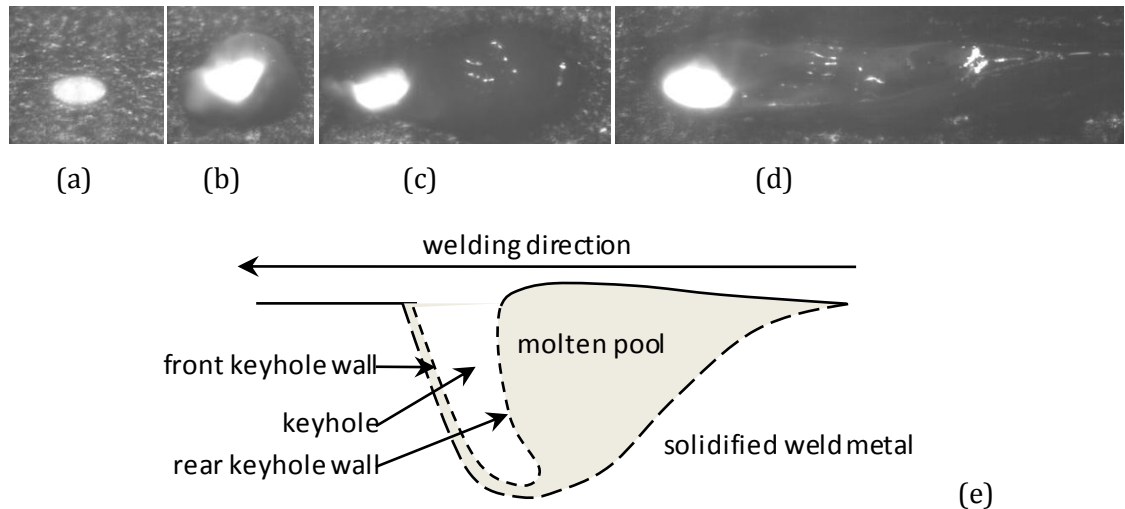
Formation of keyhole laser welding process in C-Mn steel, (a) surface melting, (b) vaporisation of substrates occurs, (c) keyhole traverses across the workpiece and melt pool begins to form, and (d) the melt pool length increases and stabilises; (e) schematic of the side view of a keyhole.
